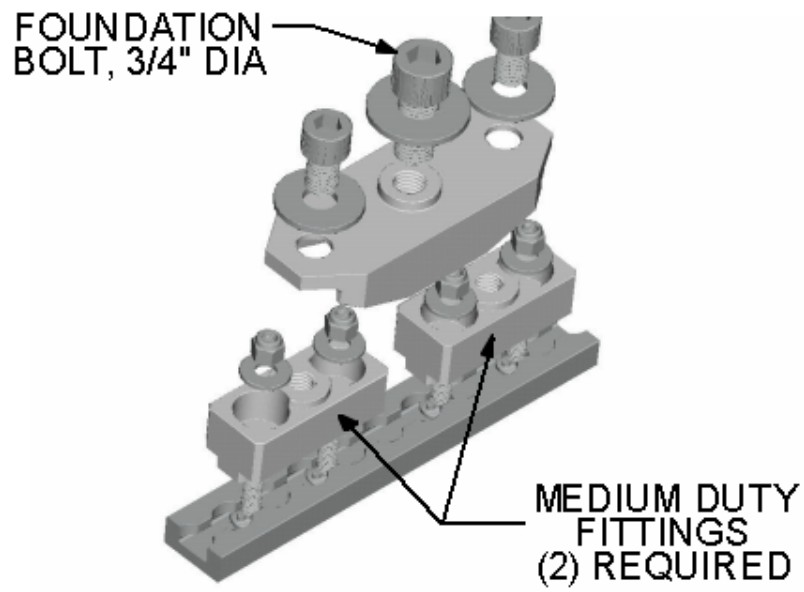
Exploded View of Heavy-duty Fitting Assembly
